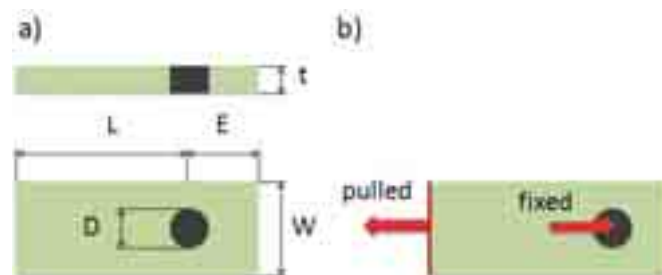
Analysed sample: a) dimensions, b) load conditions [2]
